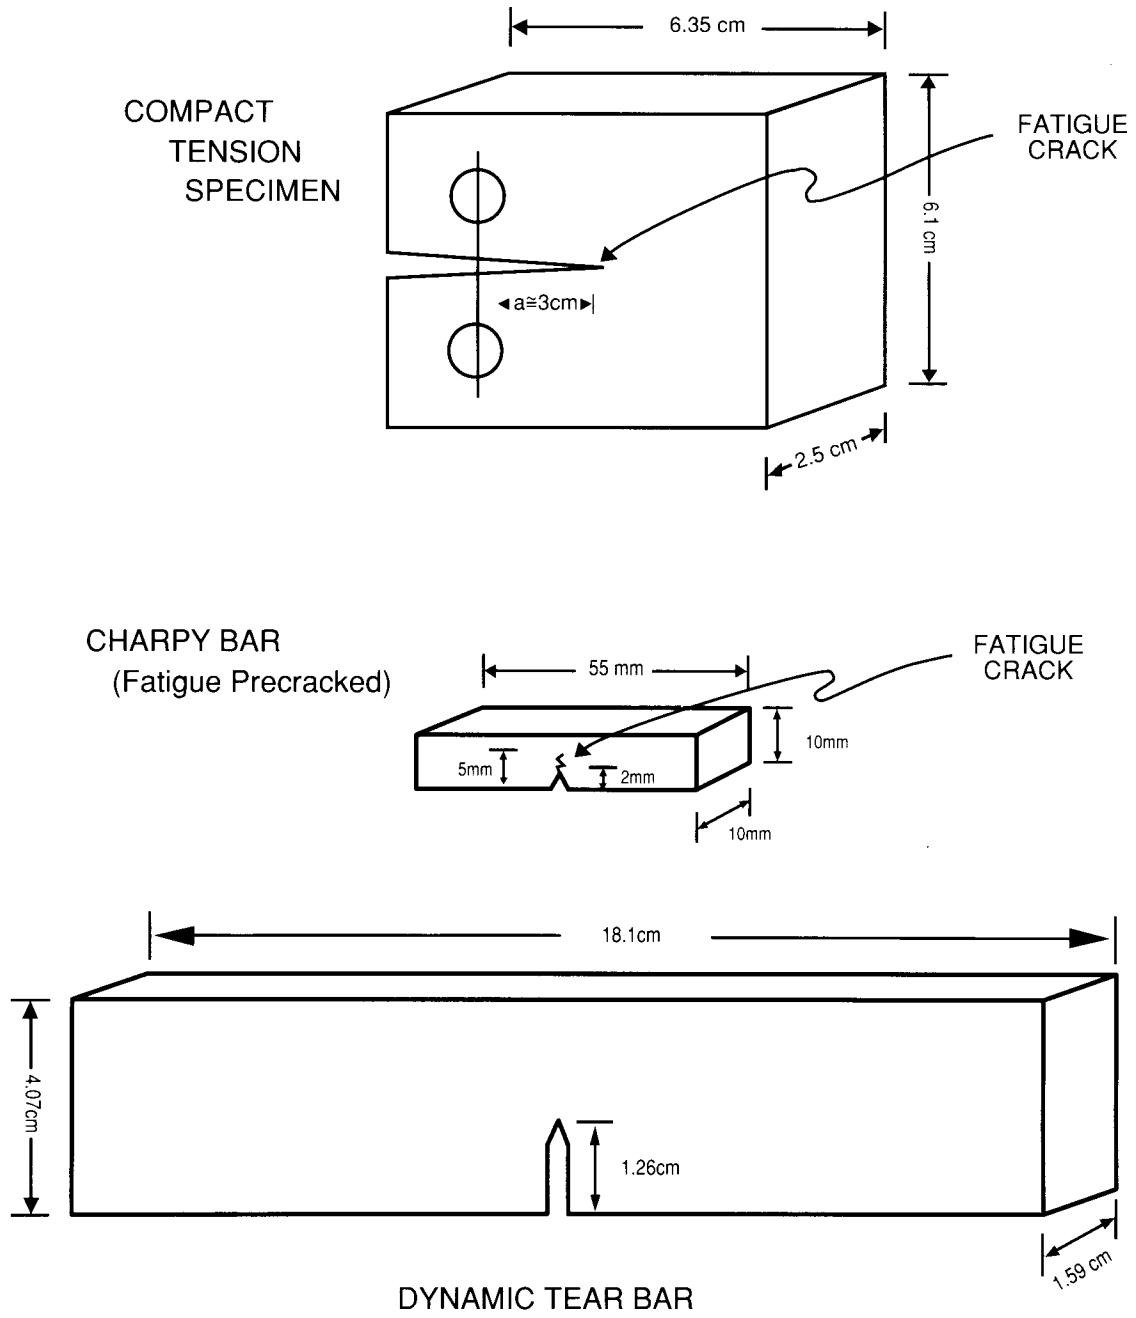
Examples of specimens used for Charpy, dynamic tear and fracture toughness testing.
